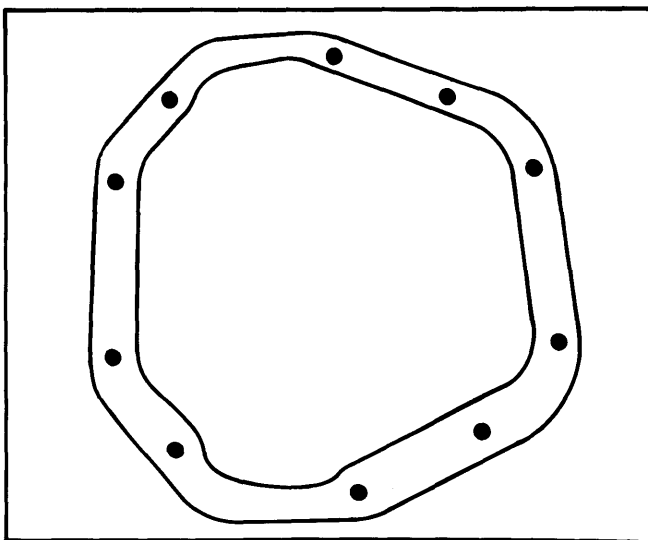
Dana/Spicer Housing Cover Gasket for Identification Purposes
